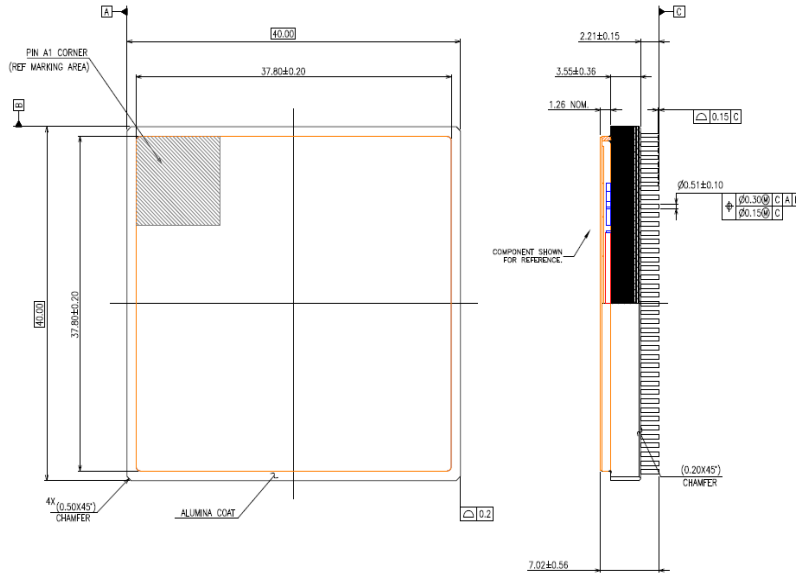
RTPFS460ZT-CG1509 Package Bottom-View
